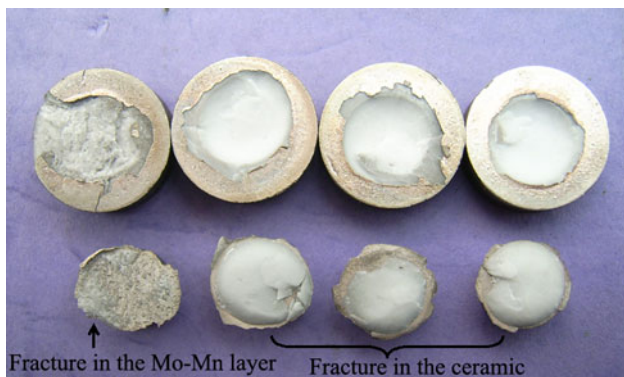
Shear fracture surfaces of Al_2O_3 ceramic/stainless steel brazed joints
